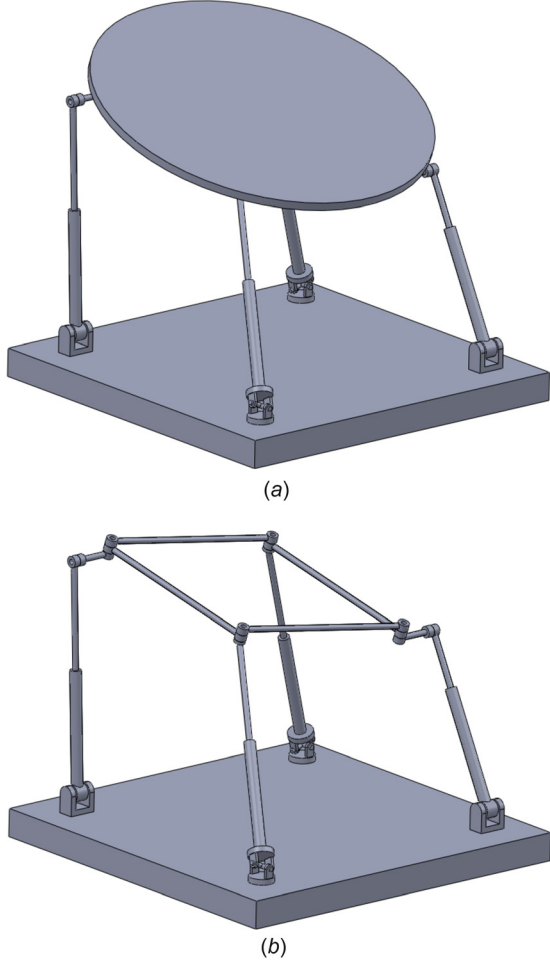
Preliminary CAD model of the mechanism: (a) with mobile platform and (b) without mobile platform
